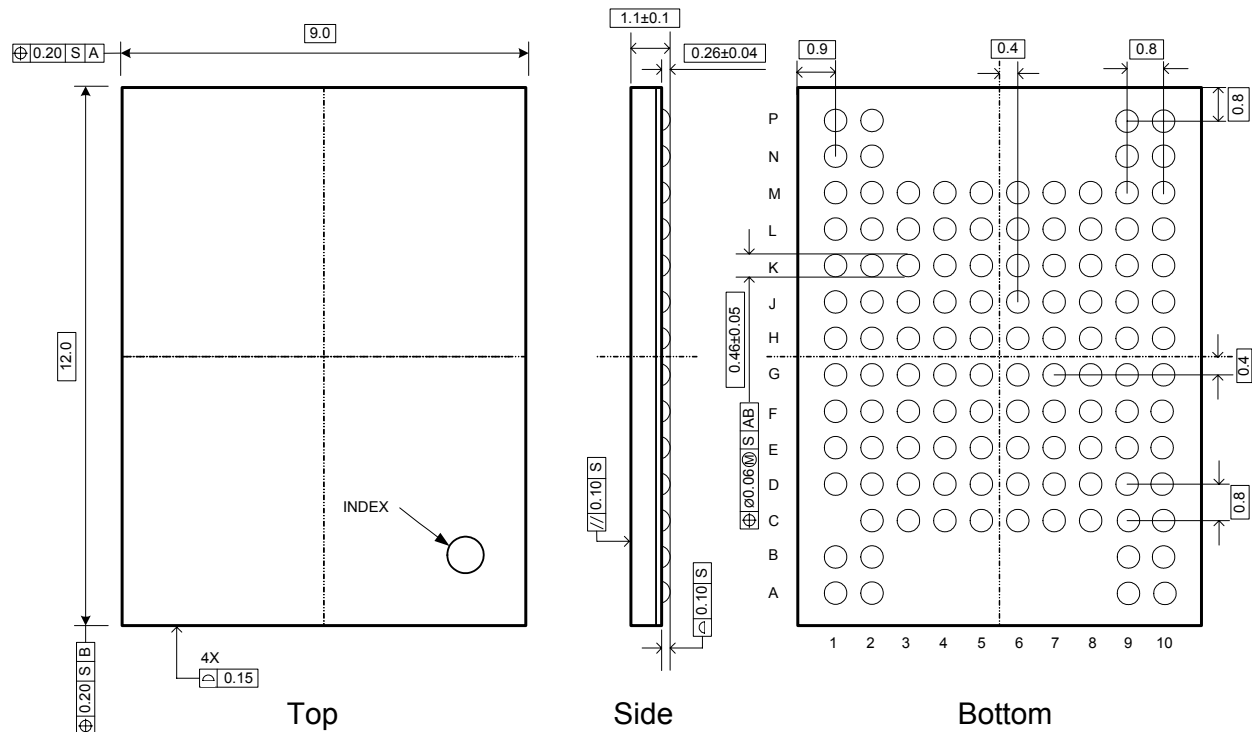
Mechanical Dimensions 9x12 FBGA Package
